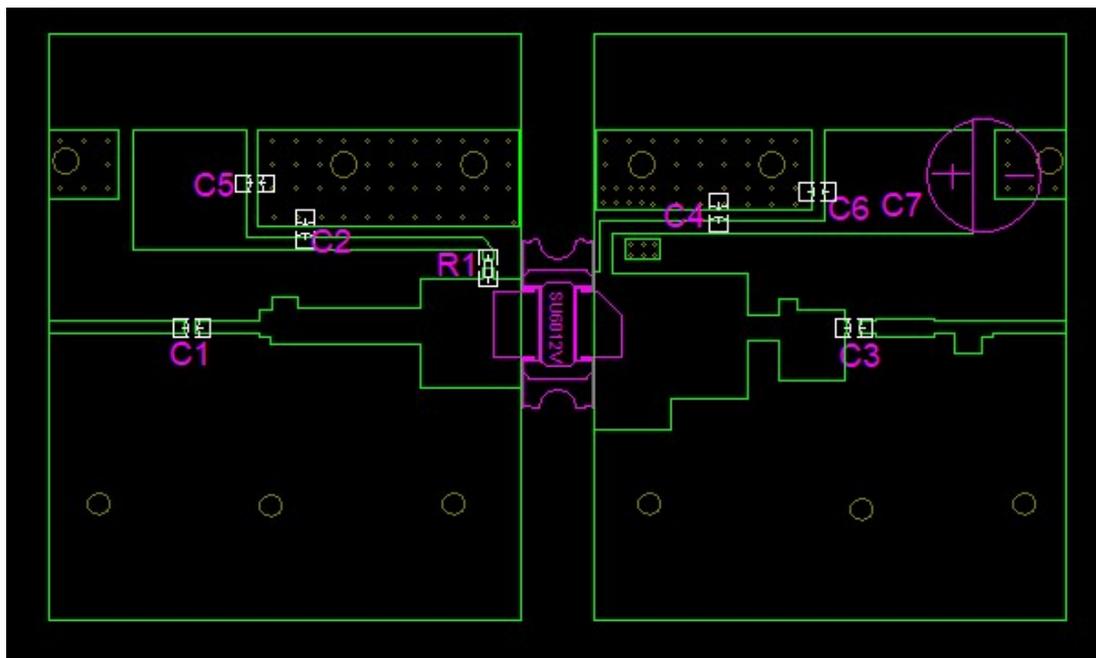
Test Circuit Component Layout (1800-4000MHz)
